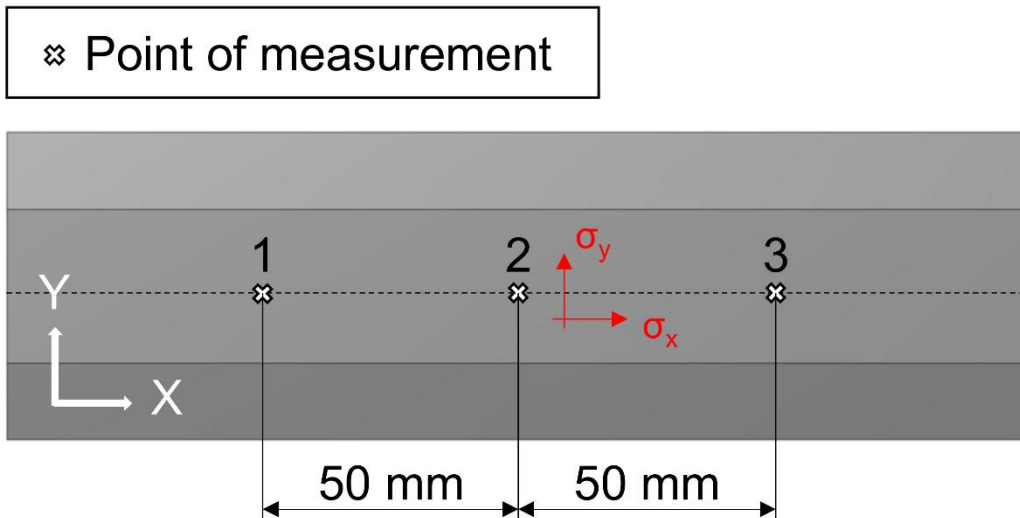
Location of surface residual stress measurement points on the tensile surface of fatigue test specimens.
